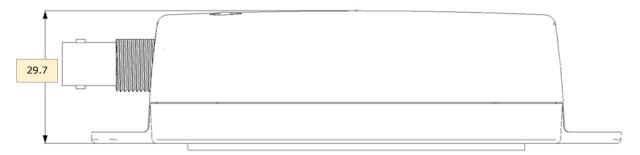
LDSBus Dissolved Oxygen Sensor Adapter Dimension - Side View
